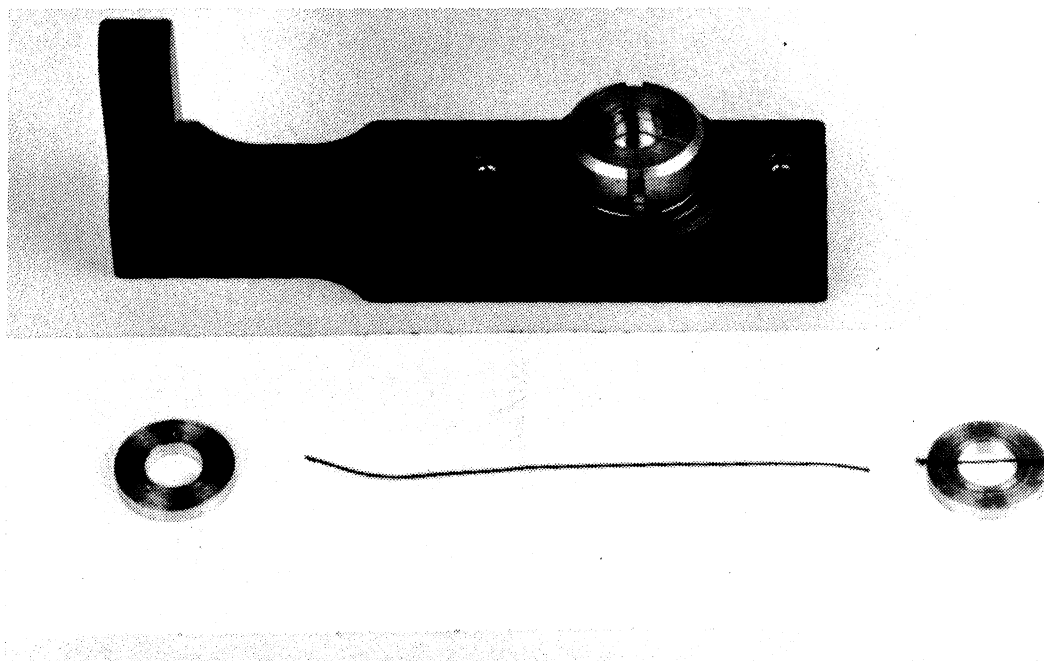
Fiber mounting using a ring with an adhesive to secure the fiber.
